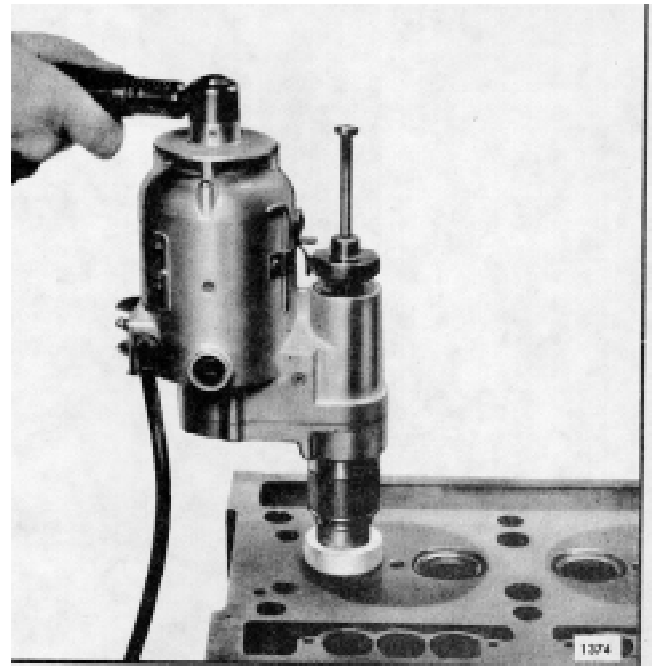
PAGE 5. Reconditioning Valve Seat Insert
